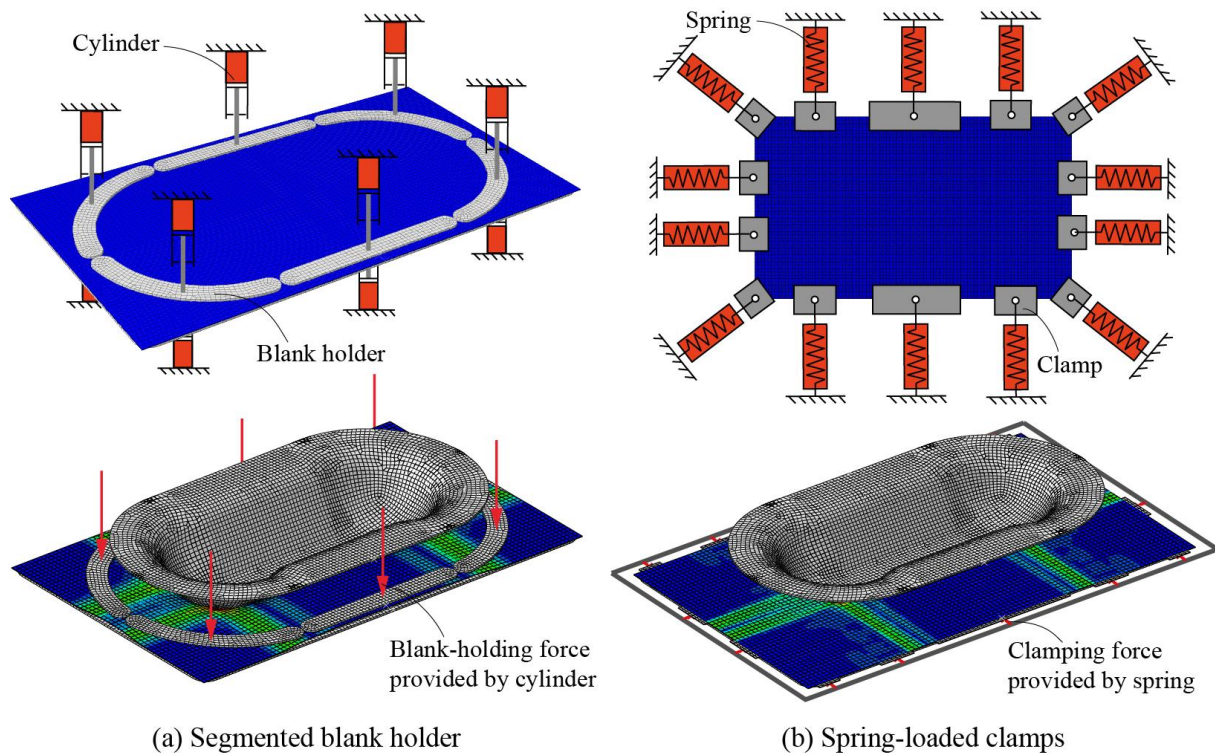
Two scenarios to material draw-in during fabric forming. (a) Segmented blank holder; (b) spring-loaded clamps.
